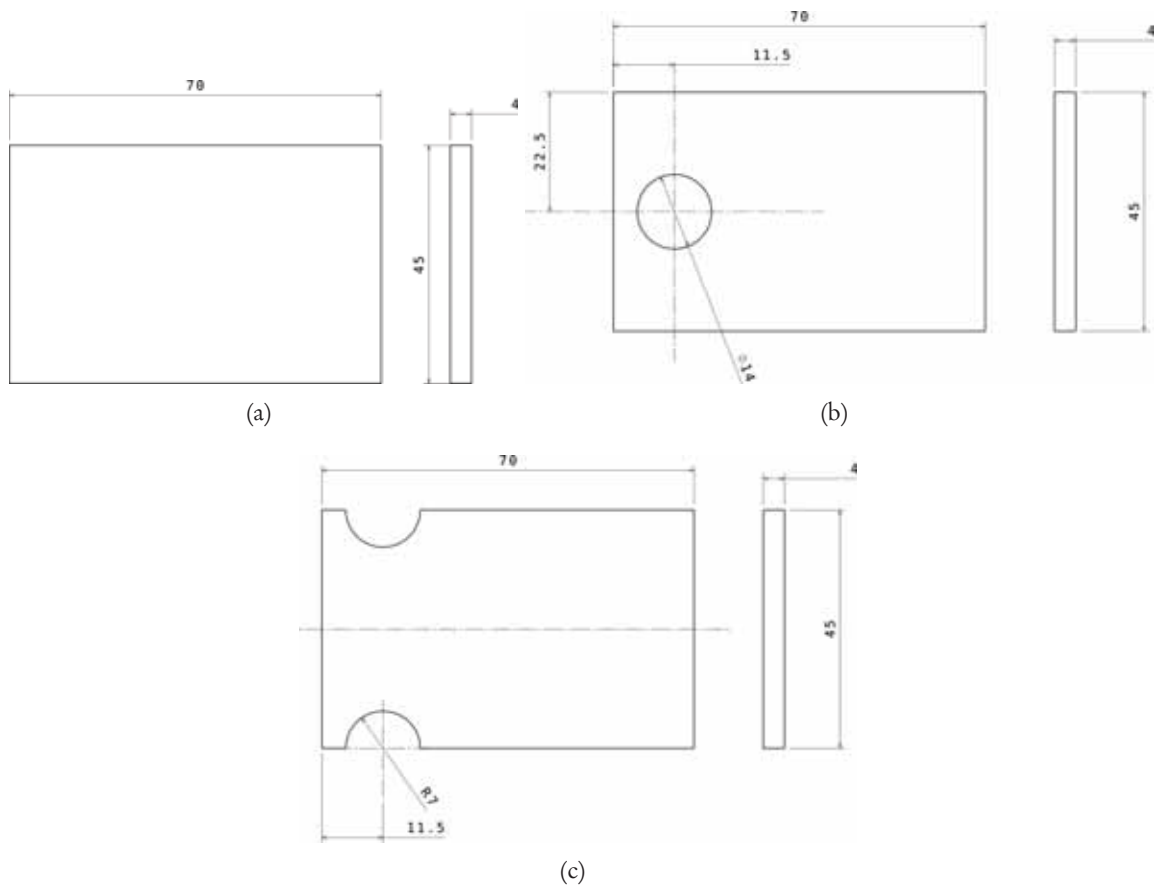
Tested specimen drafting - (a) Rectangular specimen - (b) Holed specimen - (c) Notched specimen
